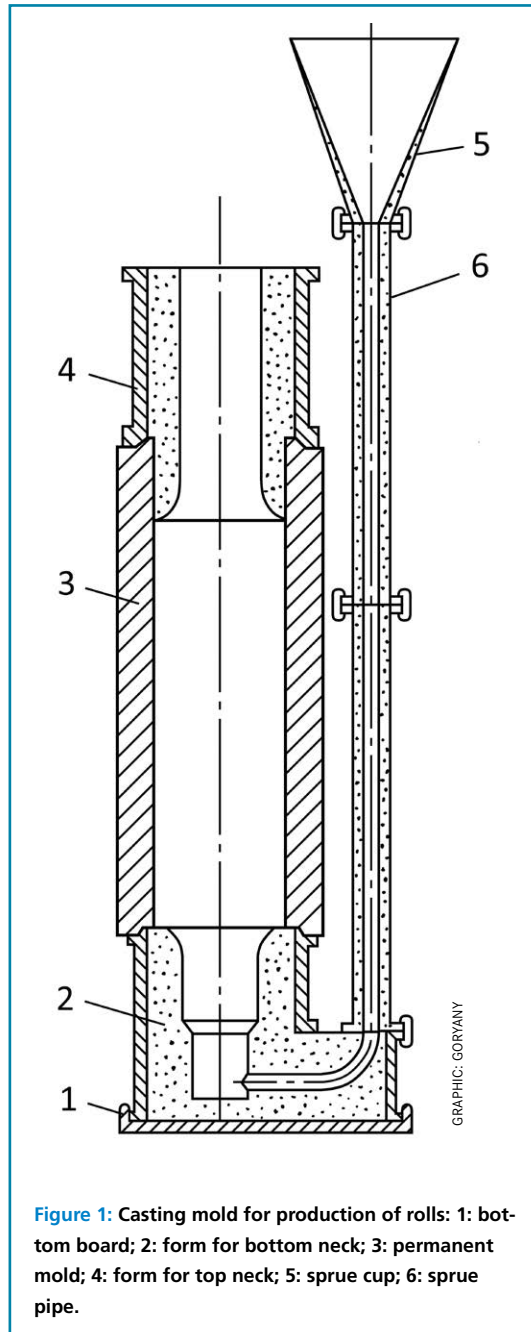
Casting mold for production of rolls: 1: bottom board; 2: form for bottom neck; 3: permanent mold; 4: form for top neck; 5: sprue cup; 6: sprue pipe.
